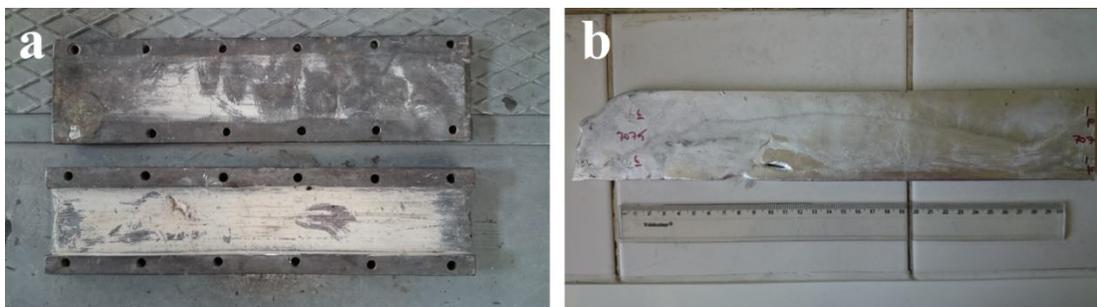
Copper mold and aluminum plate that was produced by permanent mold casting
